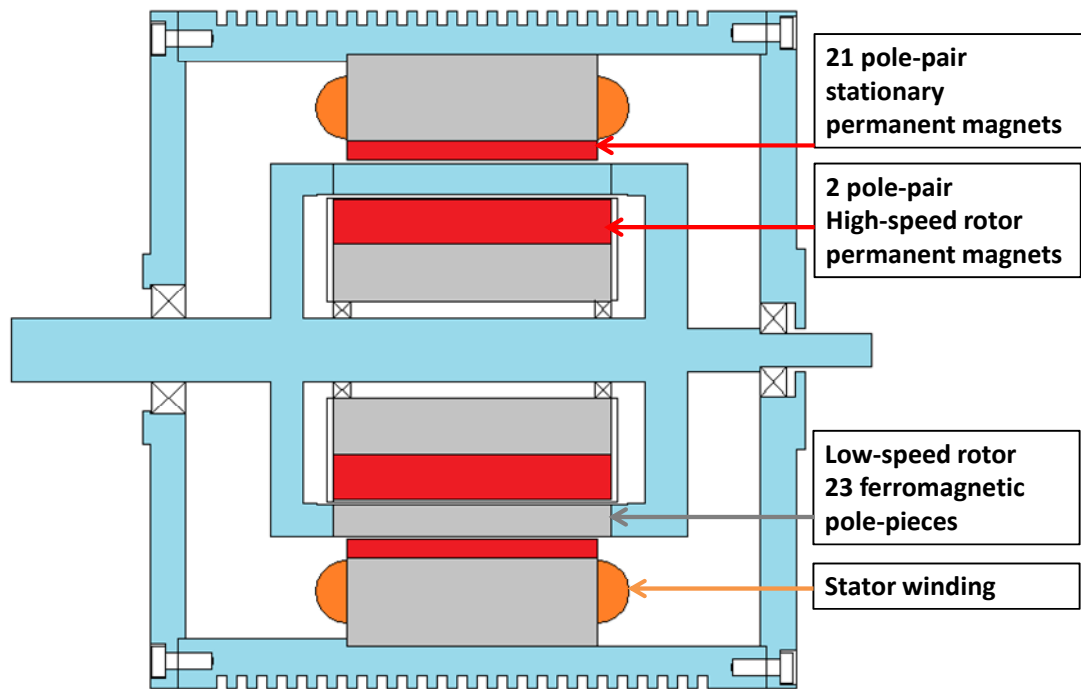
Axial cross-section of the Pseudo Direct Drive.
